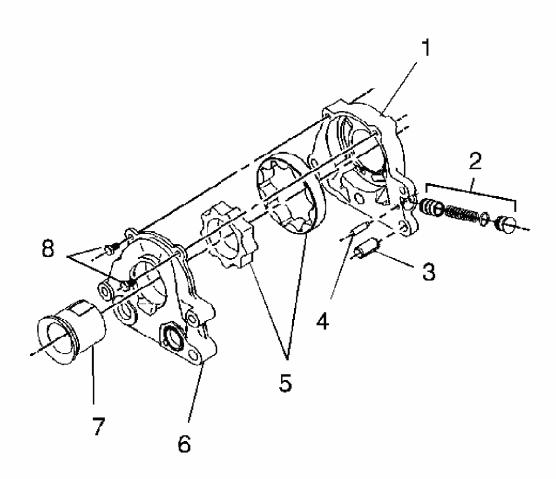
View of Oil Pump Components Courtesy of GENERAL MOTORS CORP.
